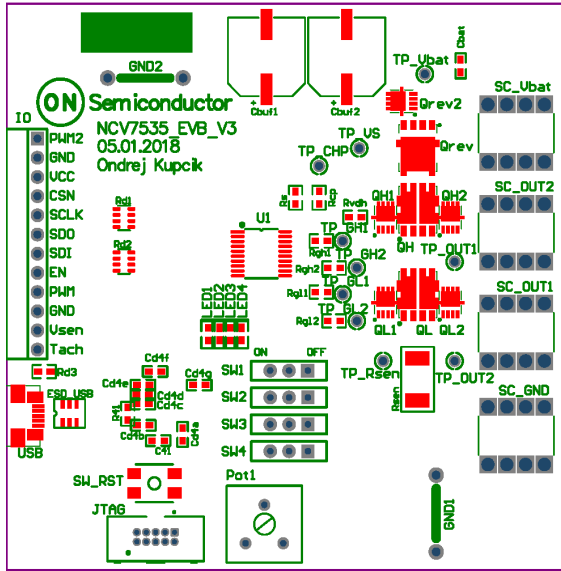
NCV7535 EVB PCB Top Assembly Drawing
